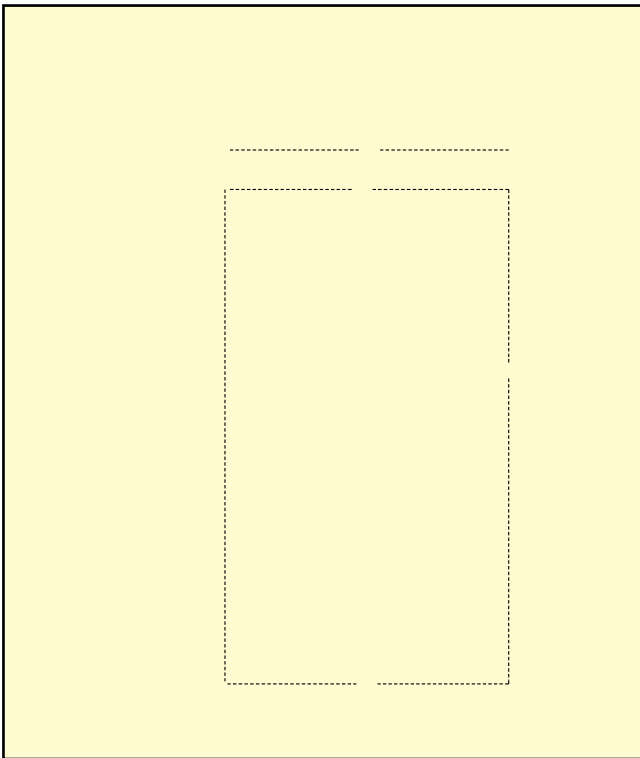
c) - General blanking scheme for the basic Mirasystem "A" panel. Width of bottom horizontal fold to be defined in consideration of sheet thickness, to permit hanging
